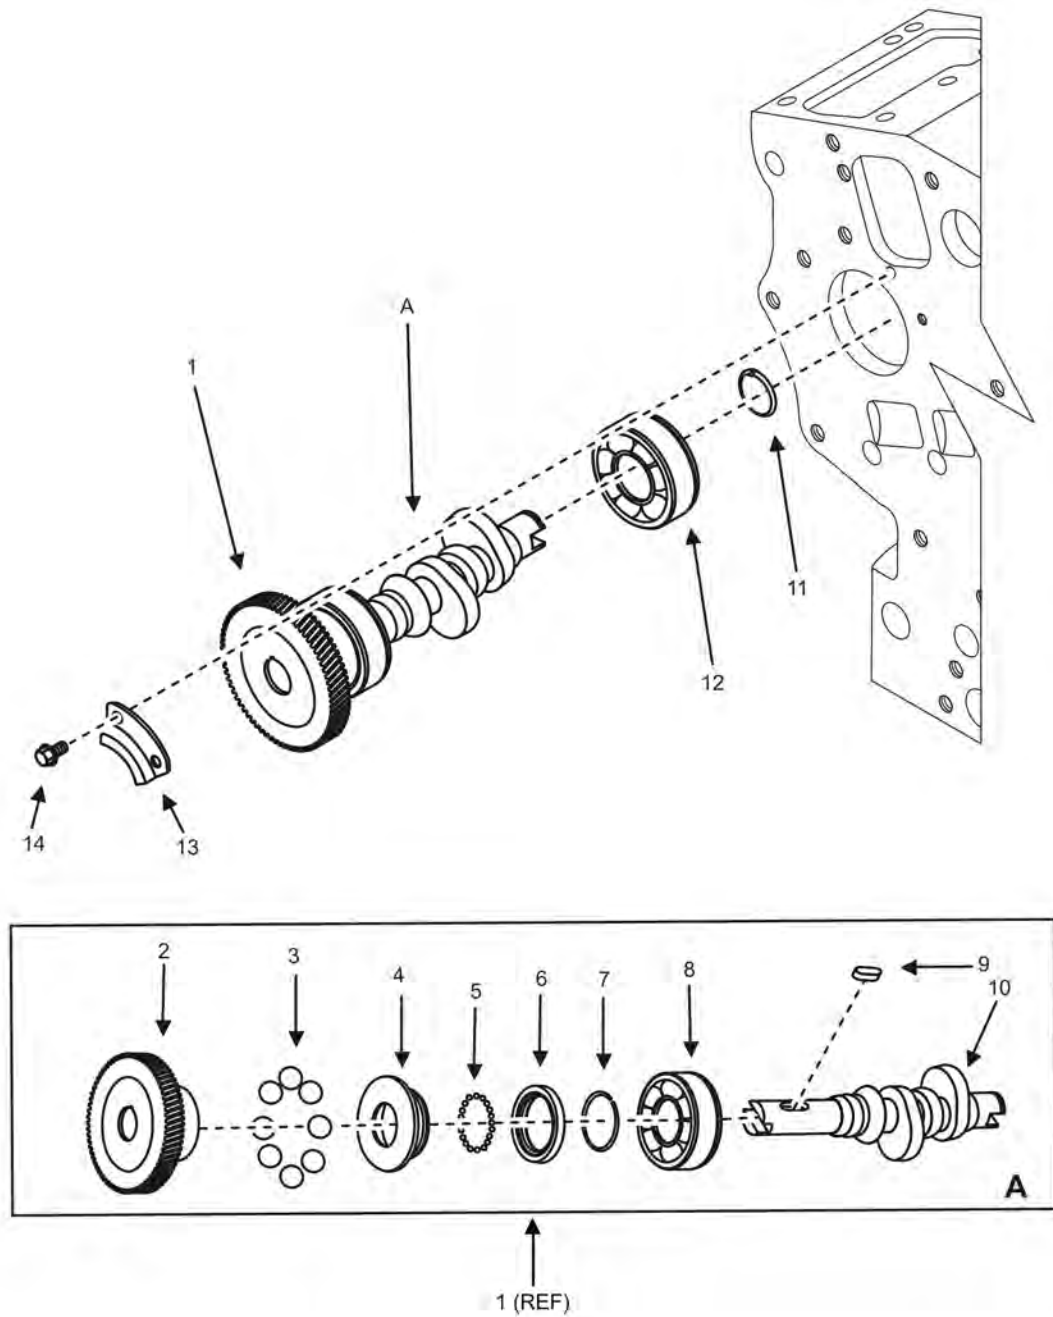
Fuel Camshaft and Fork Assembly (Sheet 1 of 2).
